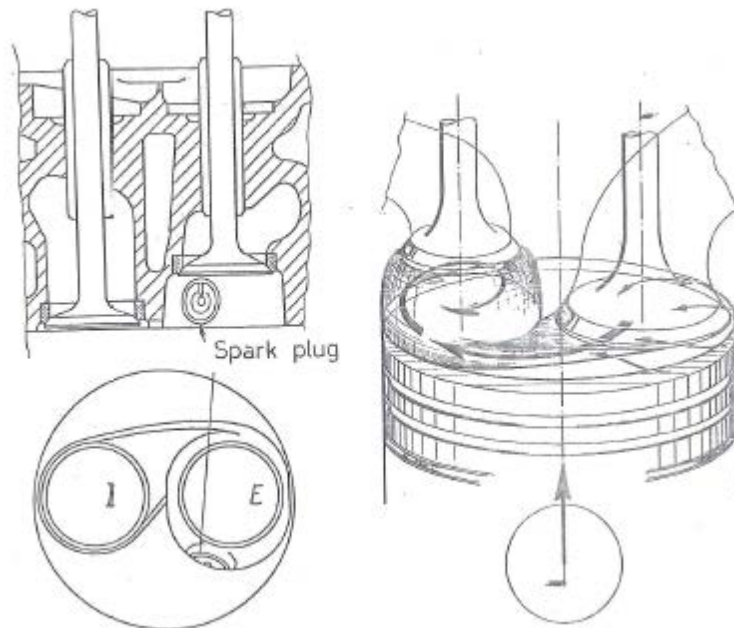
arrangement of the May Fireball combustion chamber [5-9]
